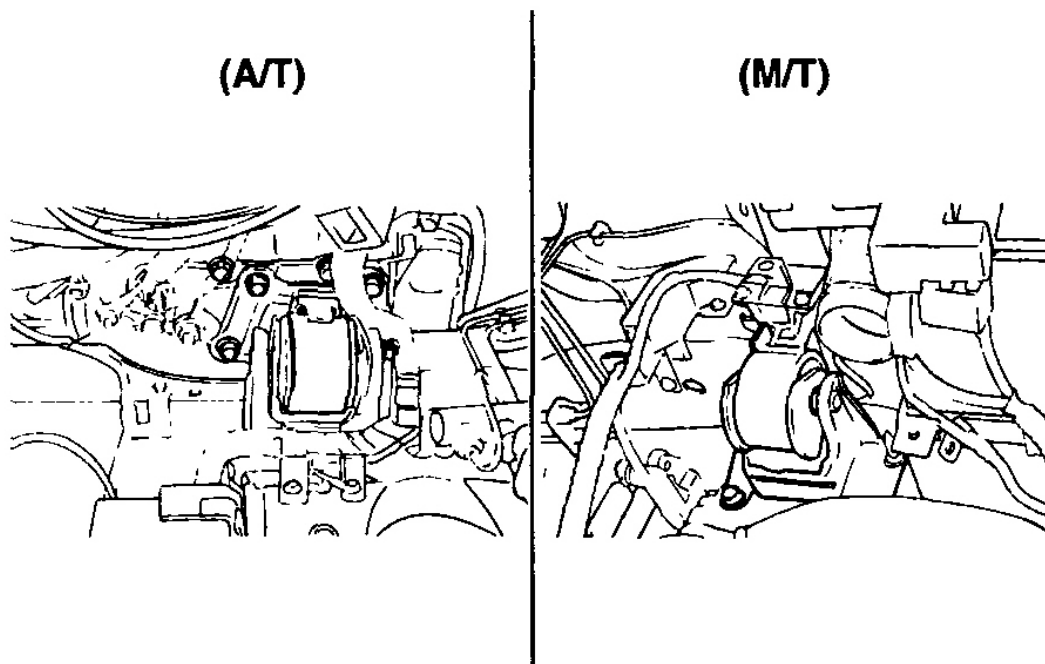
Installing Engine/Transaxle To Sub-Frame Assembly
